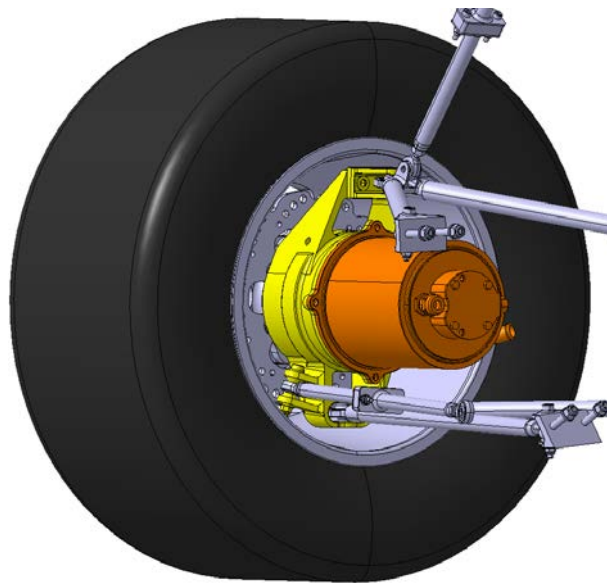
SG-e 03 wheel group: gearbox integrated in the upright (yellow) and motor (orange)
